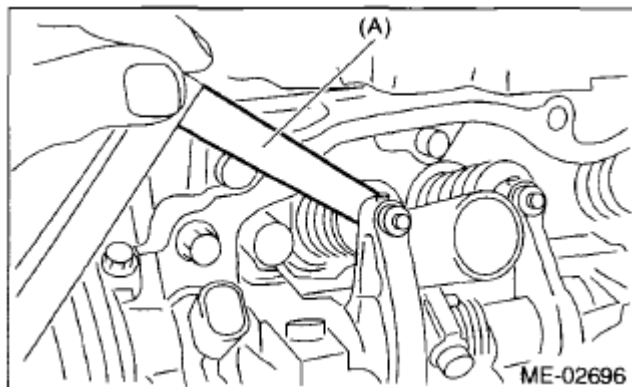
Measuring #1 Cylinder Valve Clearance Using Thickness Gauge
